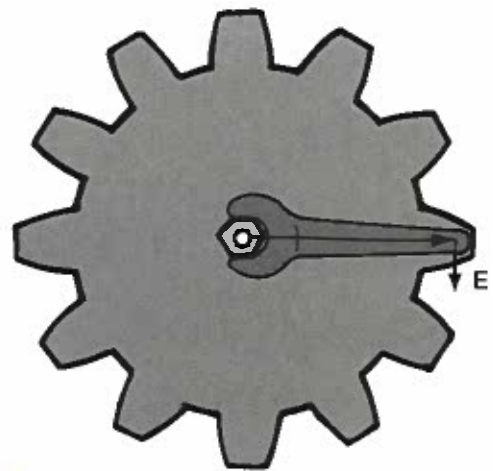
A gear can be compared to a wrench turning a nut. How is the gear similar to the wrench?
